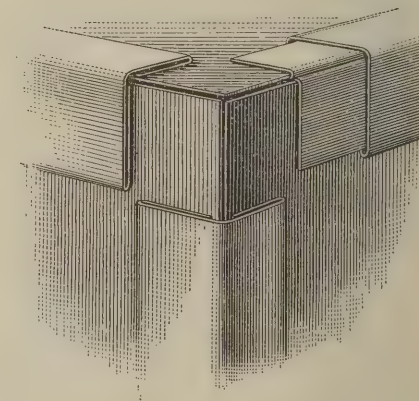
Perspective View of Corner, Showing One of the Angle Strips Slipped Back a Short Distance.
